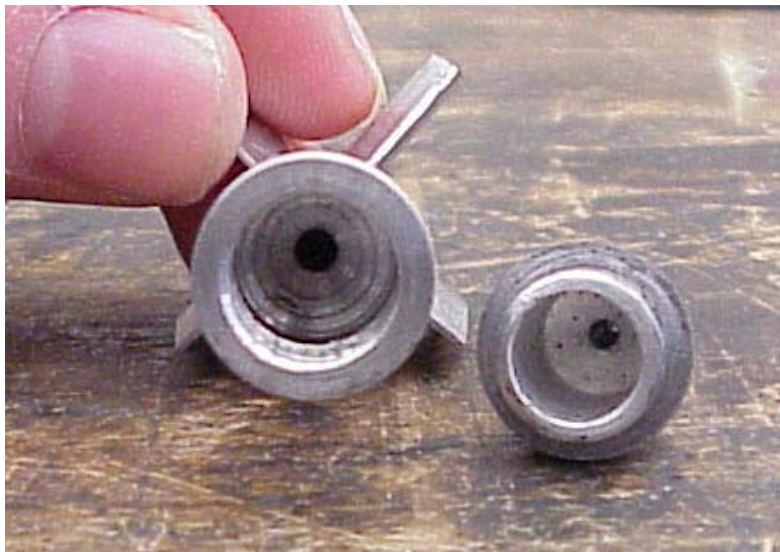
Disassembled inlet nose cone showing hollow interior and fuel passages.
